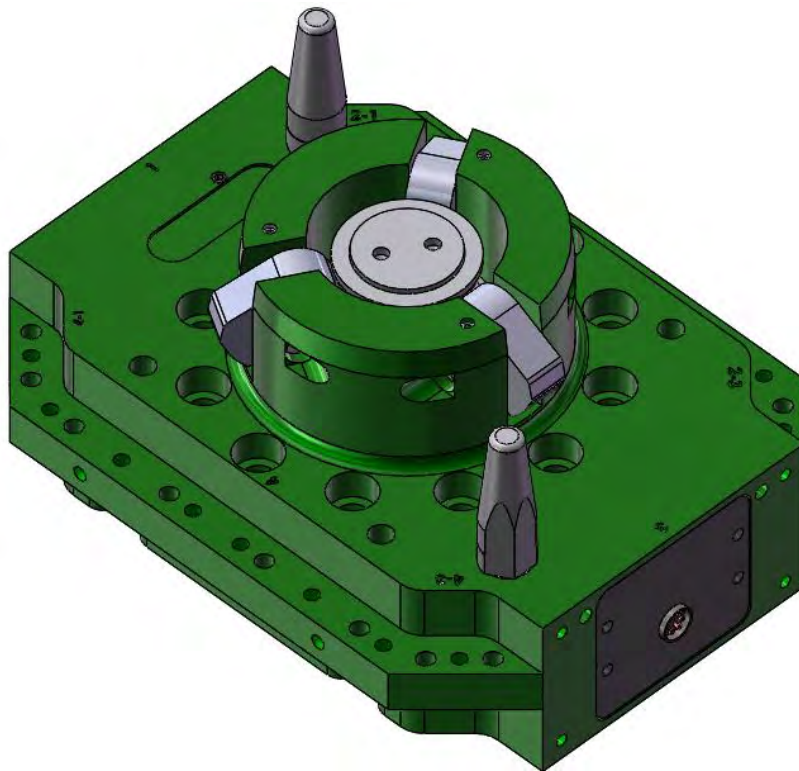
E125 Robot Adaptor Visual Inspection
